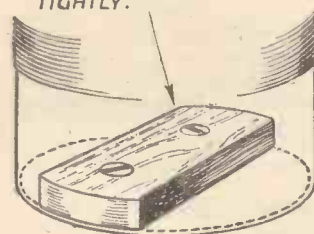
A simple and convenient method of mounting the coil over a piece of wood screwed to the baseboard.
